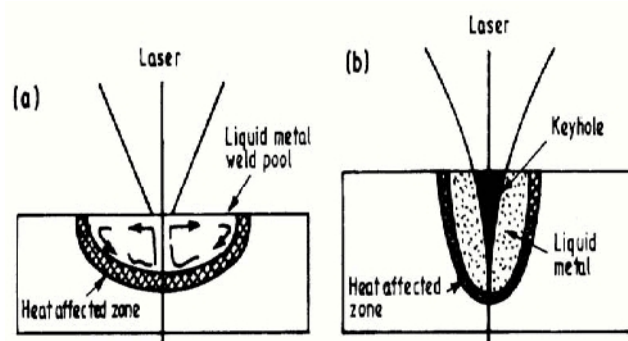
Schematic of (a) conduction welding and (b) keyhole or penetration welding.
